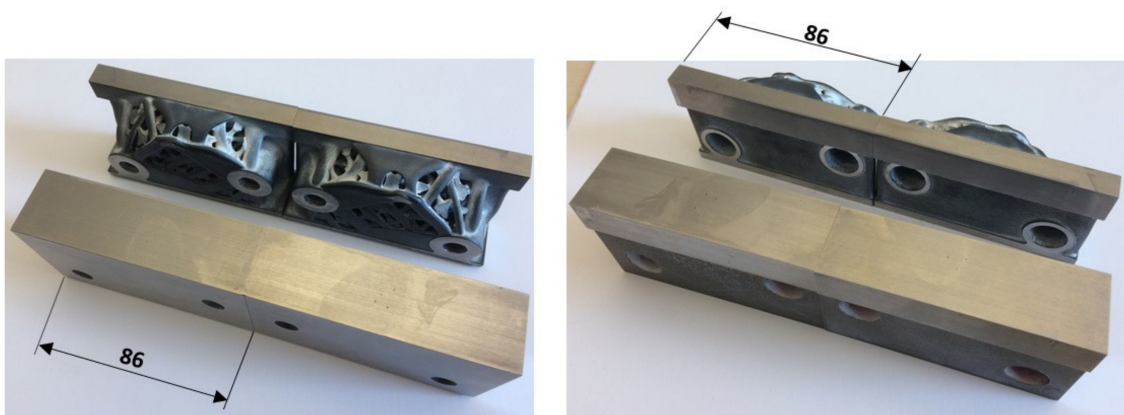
The U-bending tool: the right tool half was 3D-printed (L-PBF) as a solid piece. The left tool half was topology optimized at the volume fraction of 0.45 (Figure 9) and 3D-printed (L-PBF). Both tool halves were 3D-printed in maraging steel DIN 1.2709. Both tool halves managed 50,000 U-bends and were approved [129]. All displayed dimensions are in mm.
